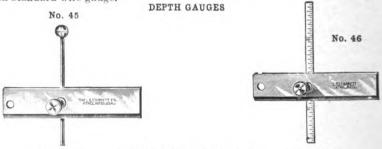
D DEPTH GAUGES, No. 45 Fig. 5653E
